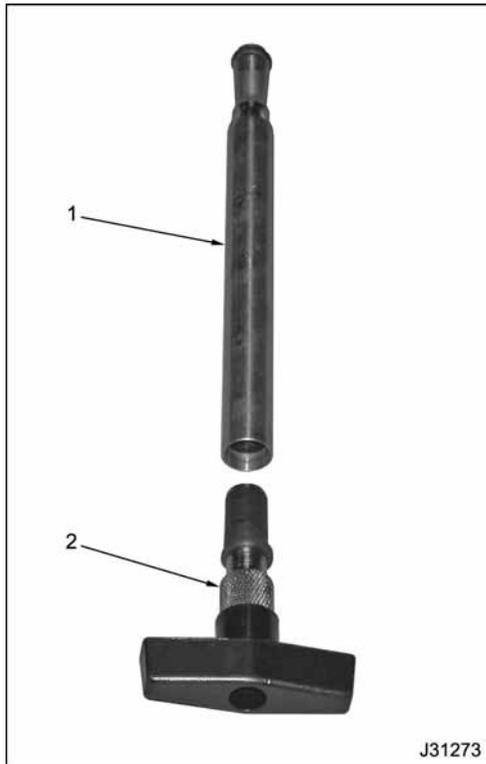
Crankcase-to-head tube and Crankcase-to-head Removal Tool
